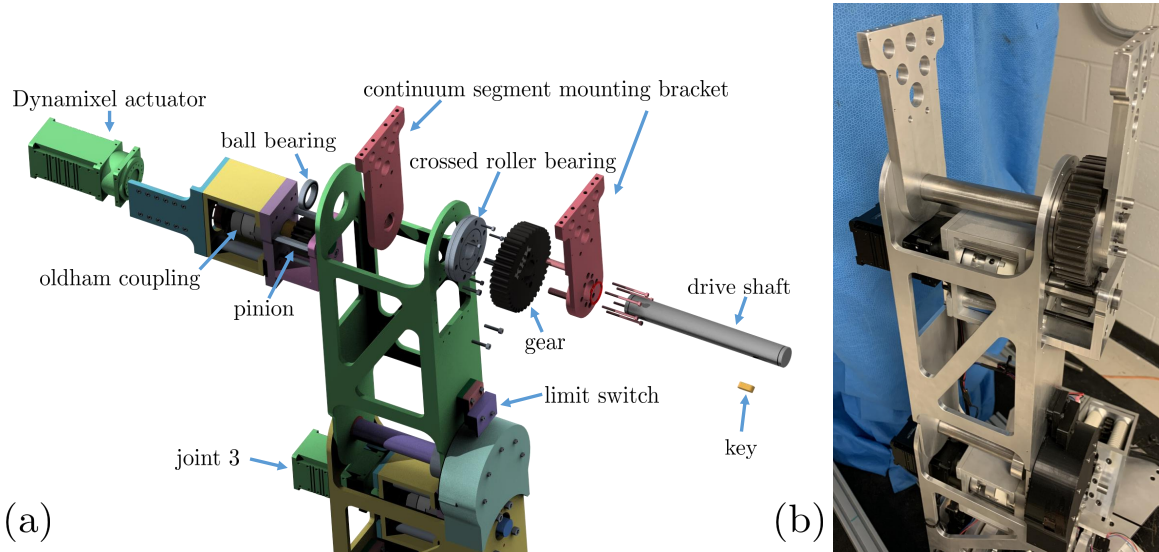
The design of the fourth revolute joint (shown without the continuum segment attached): (a) exploded view rendering (b) photograph of the physical system.
